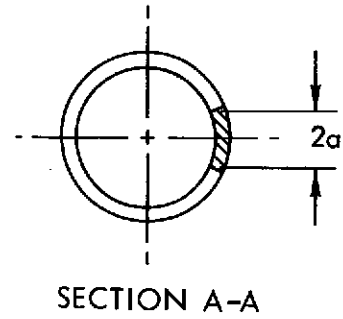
Through Cracked Tube Specimens for Mode II Tests
